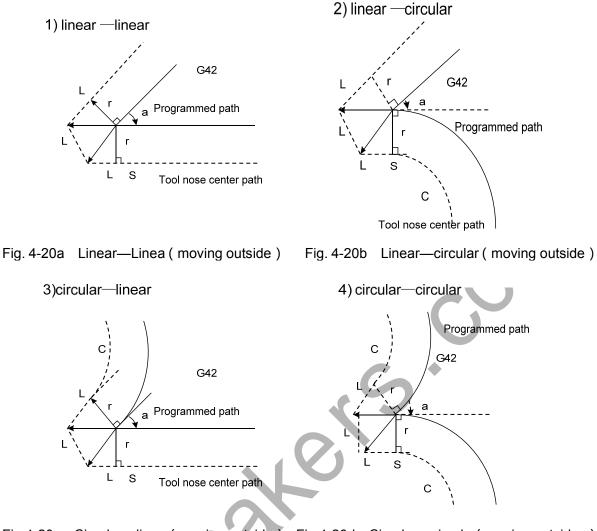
Circular-linear(moving outside) Fig.4-20d Circular-circular(moving outside)
